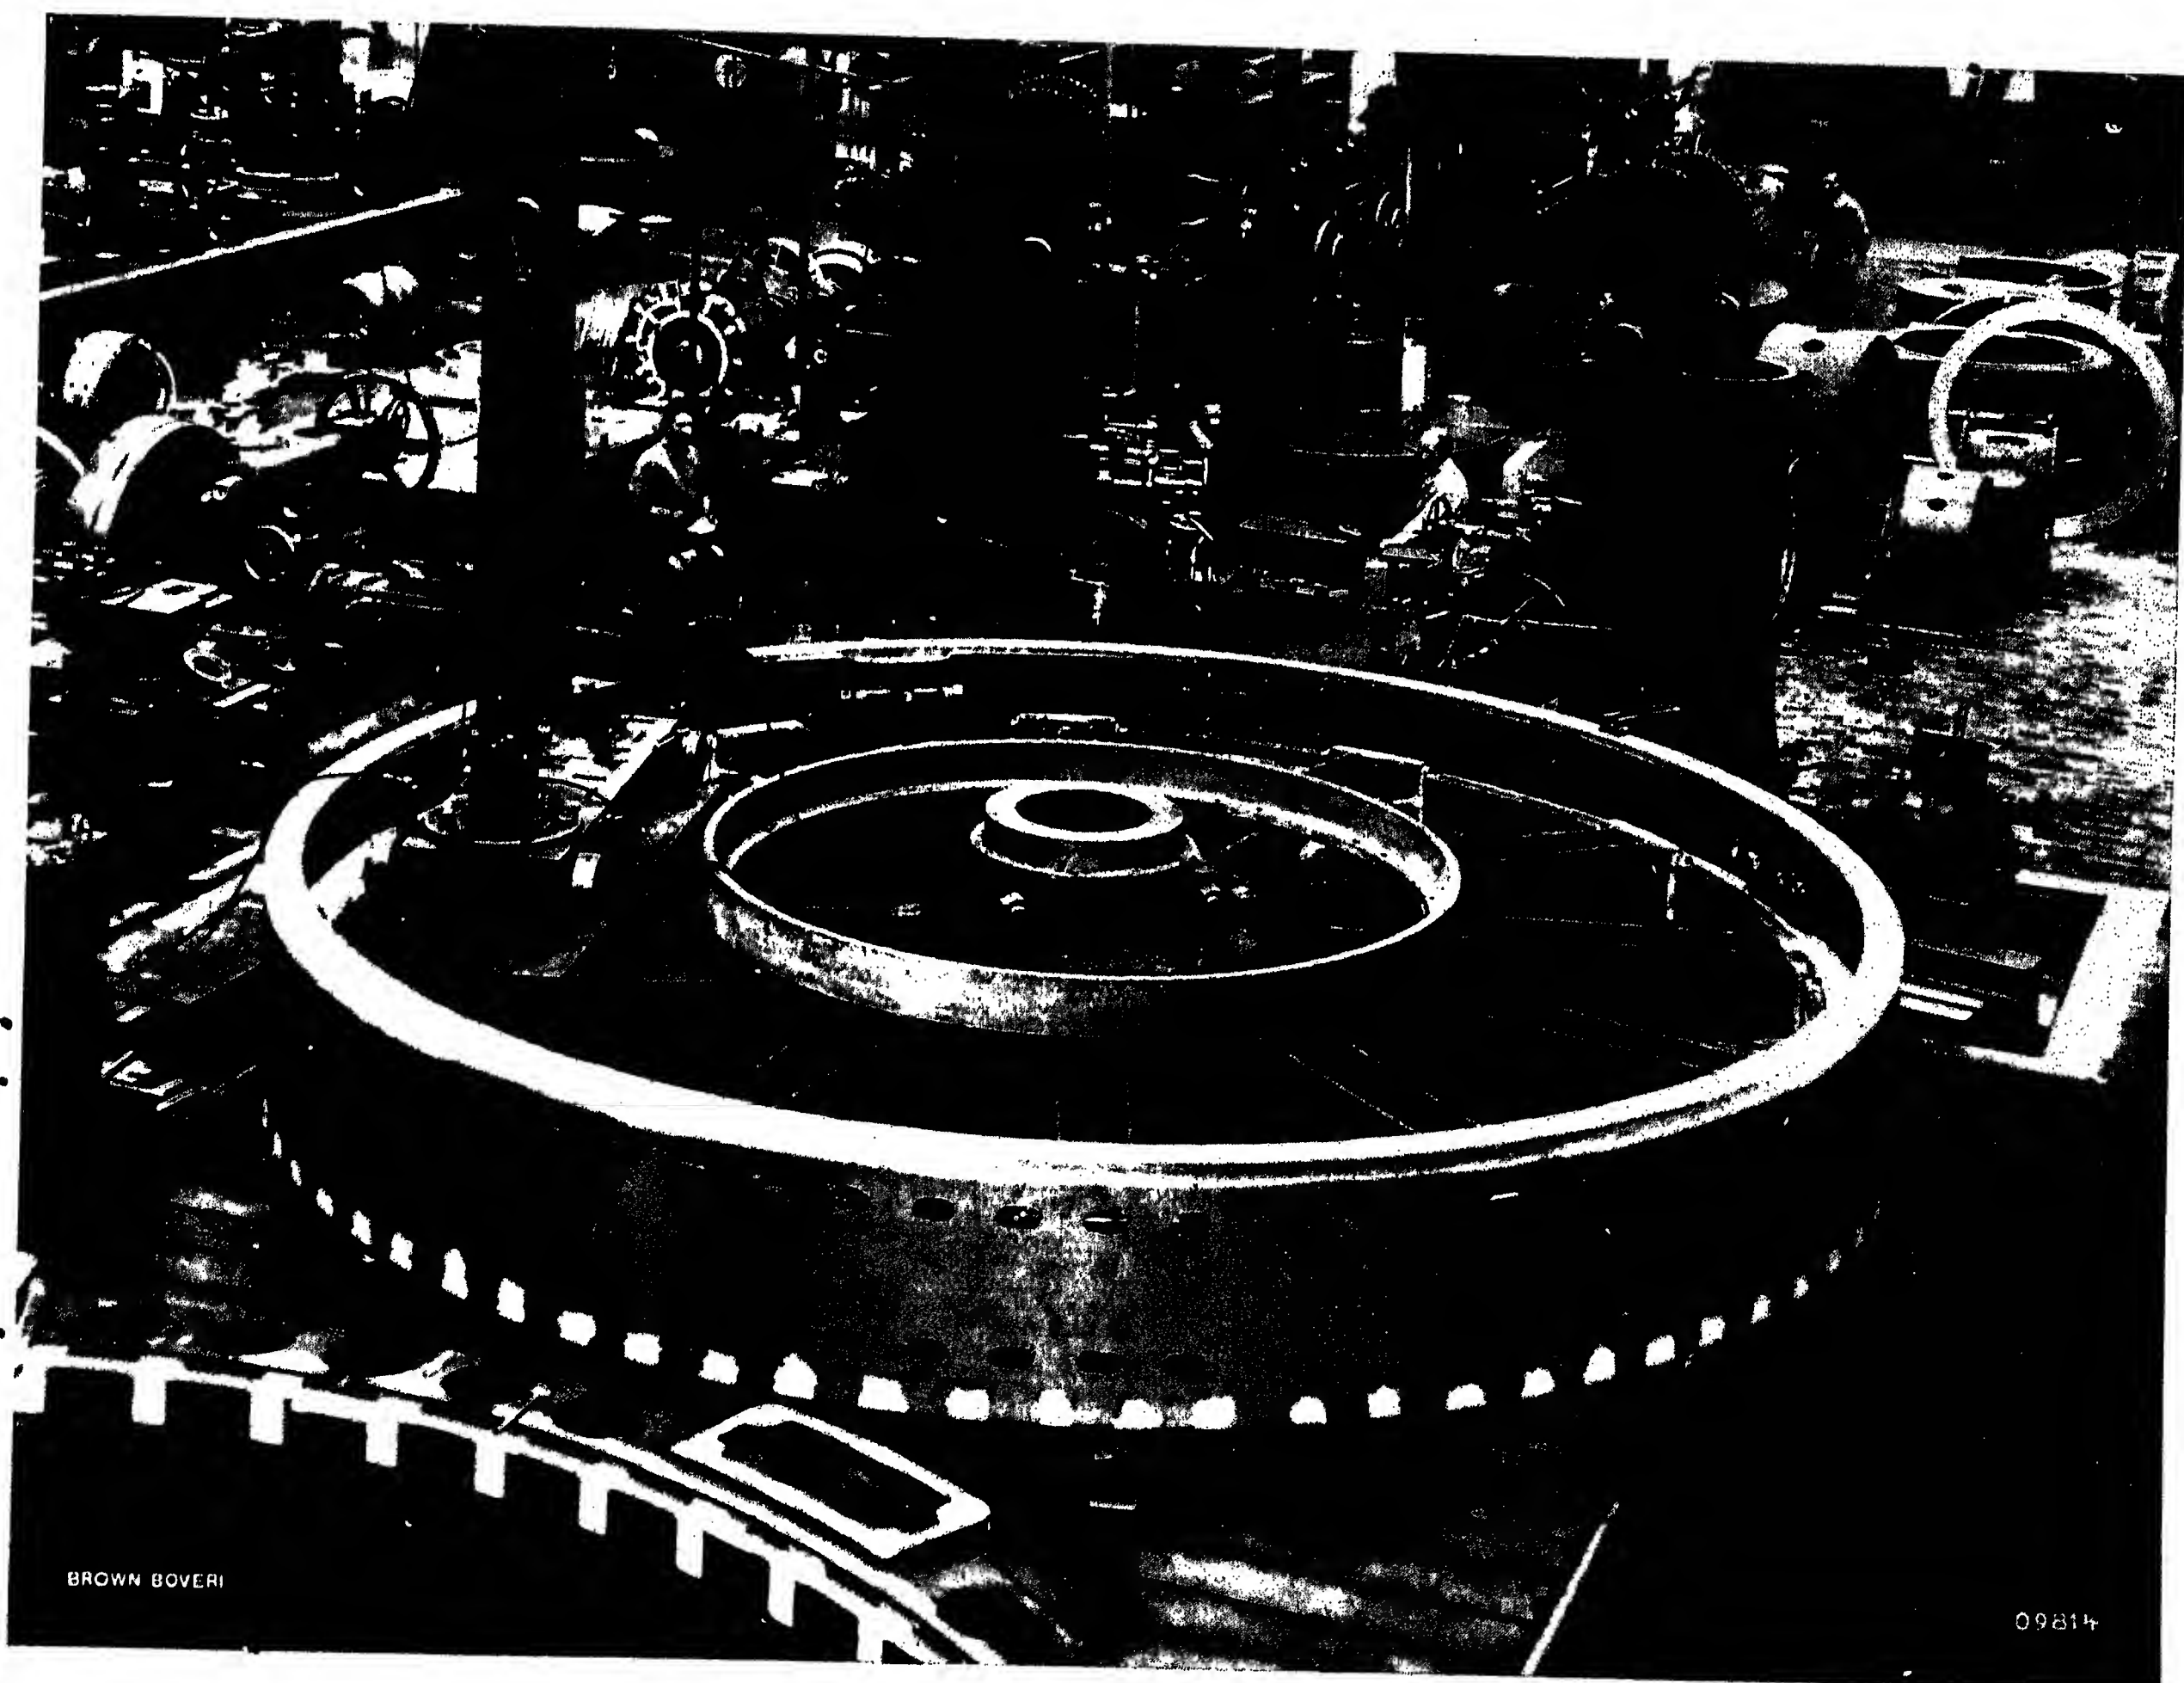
Machining the pole wheel of a three-phase alternator, 7050 kVA, 83.3 r. p. m.
